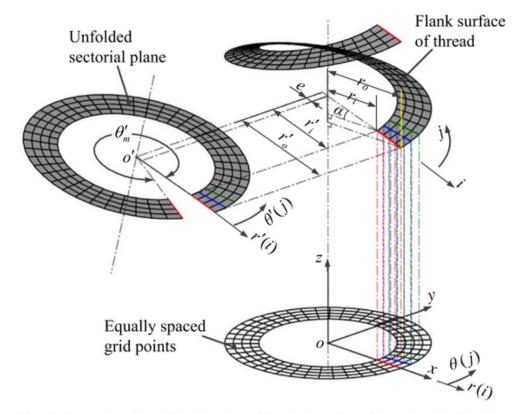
Approximately unfolded drawing of the flank surface of threads and grid points.
